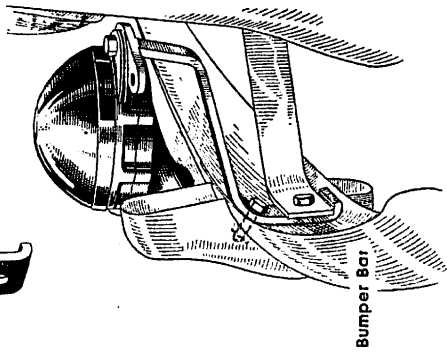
Mounting of holder HOBE 17 G 1 Z
